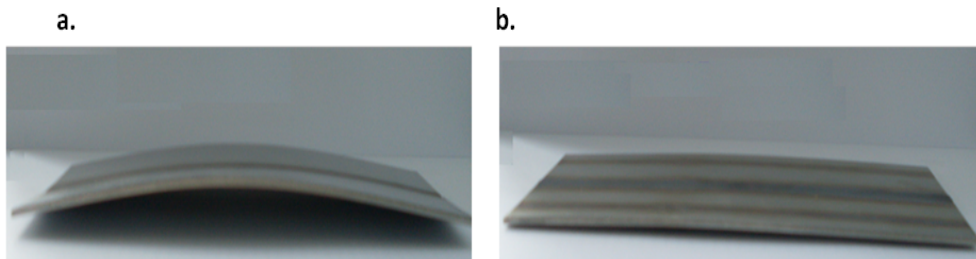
(a) Out-of-plane deformation after conventional welding and (b) after welding with additional heating using two single nozzle burners.
